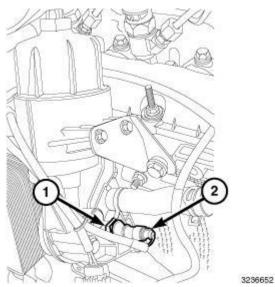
Engine Oil Pressure Sensor & Connector Courtesy of CHRYSLER GROUP, LLC
